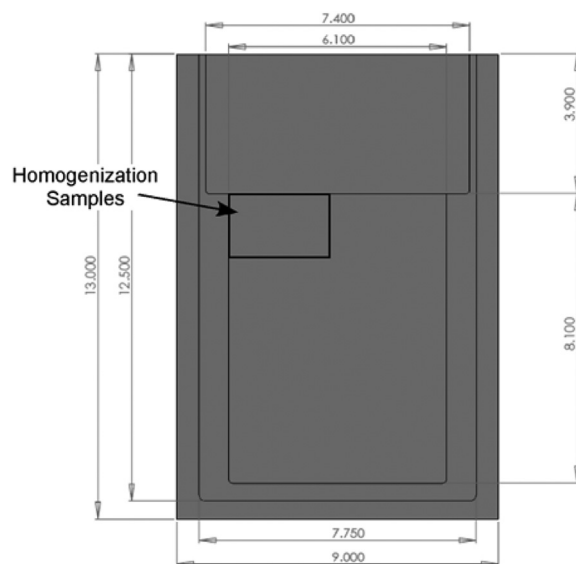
Drawing of graphite mold used to cast the DU-10wt.%Mo plate. Casting and hot-top dimensions (in inches) and the location of the homogenization samples are shown. The thickness of the cast plate is 0.65 in (16.5 mm) and the thickness of the hot-top is 0.90 in (22.86 mm).
